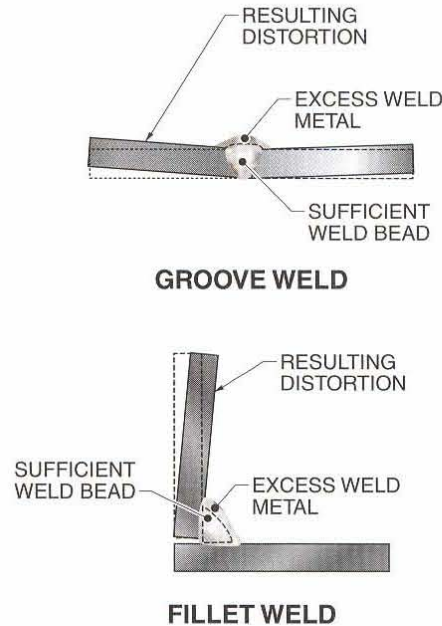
Excess weld metal increases distortion in a weld.
